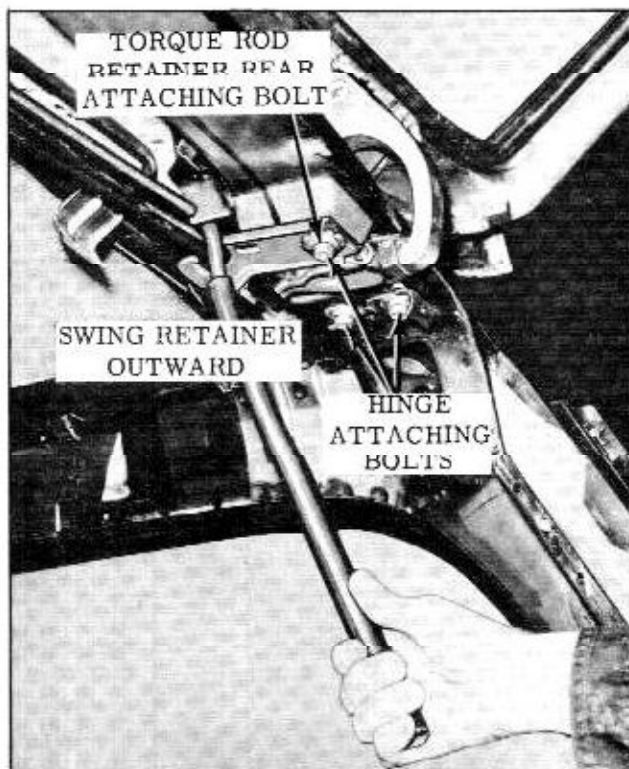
Back Door Hinge & Torque Rod Removal
